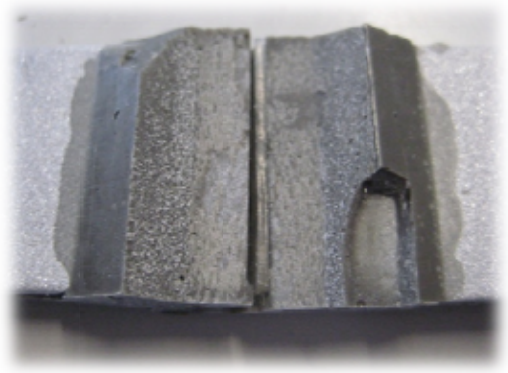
AV138 30 DEGREES TAPER FRACTURE SURFACE
